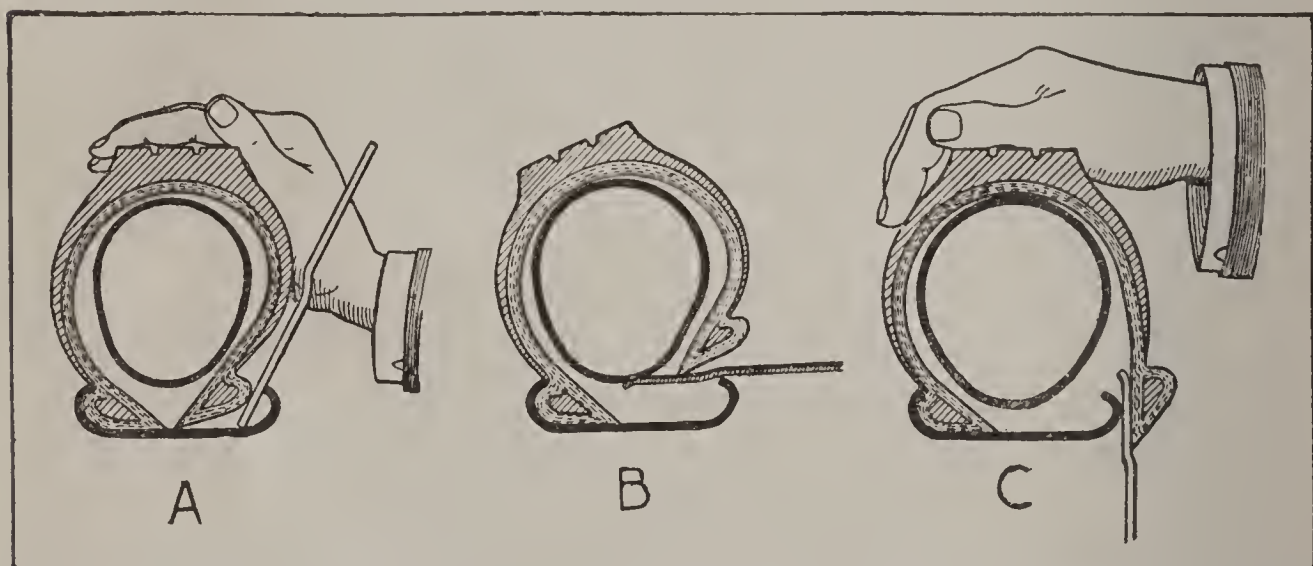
How to Remove Motorcycle Tire Outer Casing Without Pinching Inner Tube.
